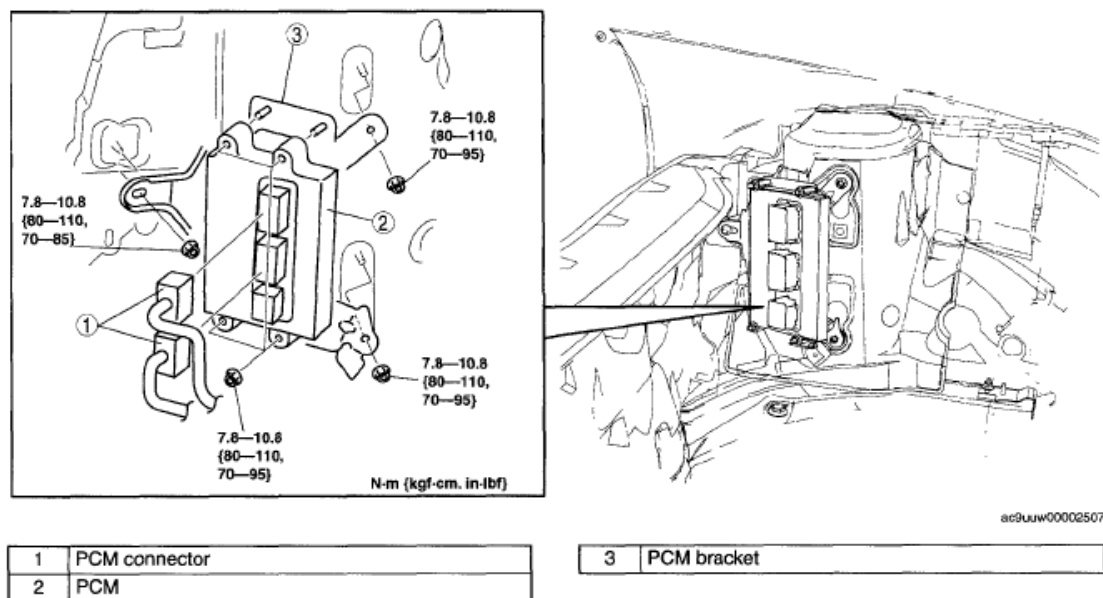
Identifying PCM Bracket, Connector & Torque Specifications
